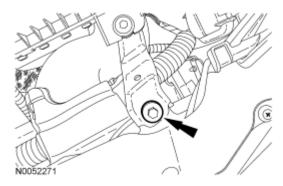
Locating Air Cleaner Assembly Bracket Bolt Courtesy of FORD MOTOR CO.
